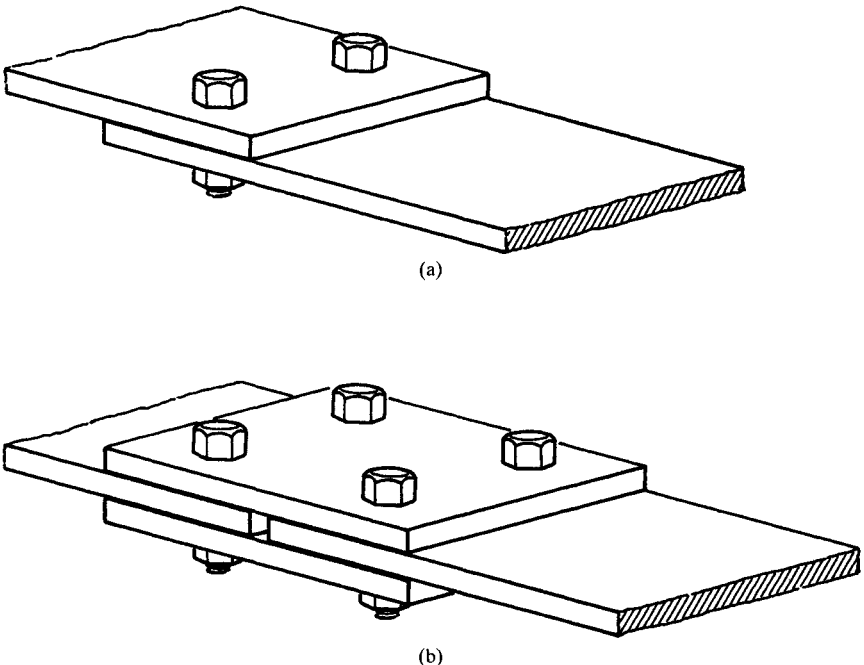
Joints loaded in shear. (a) Lap joint; (b) butt joint.
